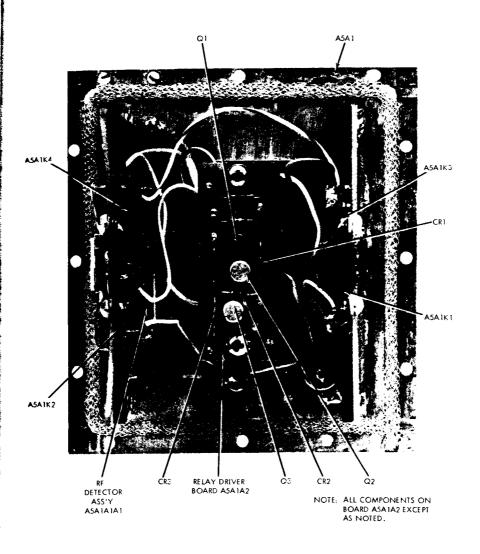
Low-Pass Filter Assembly A5 (Sheet 2 of 2)
